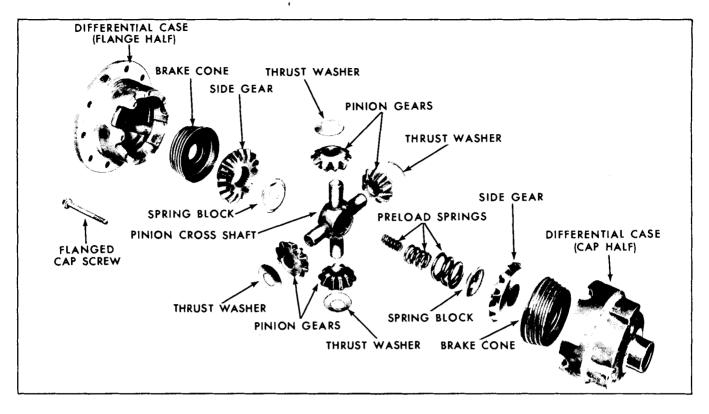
B-3 Exploded View of Four Pinion Safe-T-Track - A and G Series - "P" Axle
